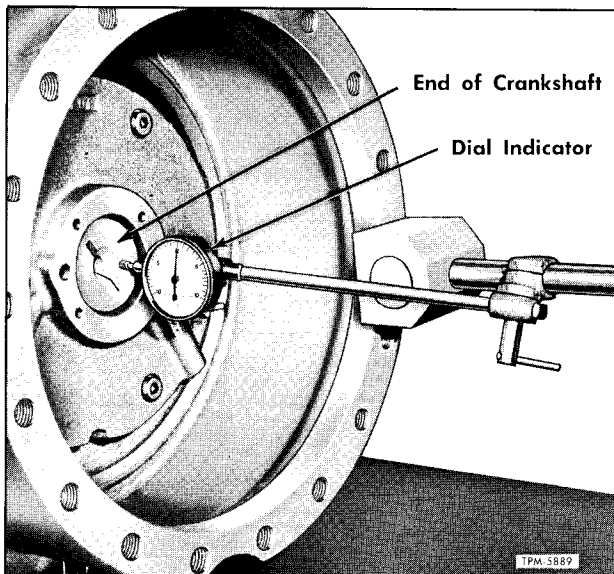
Checking Crankshaft End Play Using Dial Indicator
